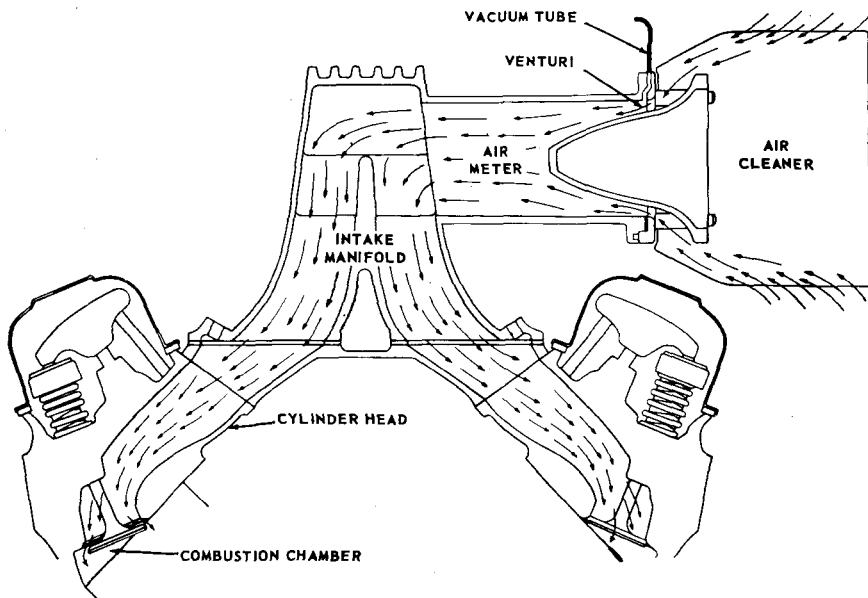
Air intake of fuel-injection system. (Chevrolet Motor Division of General Motors Corporation)
